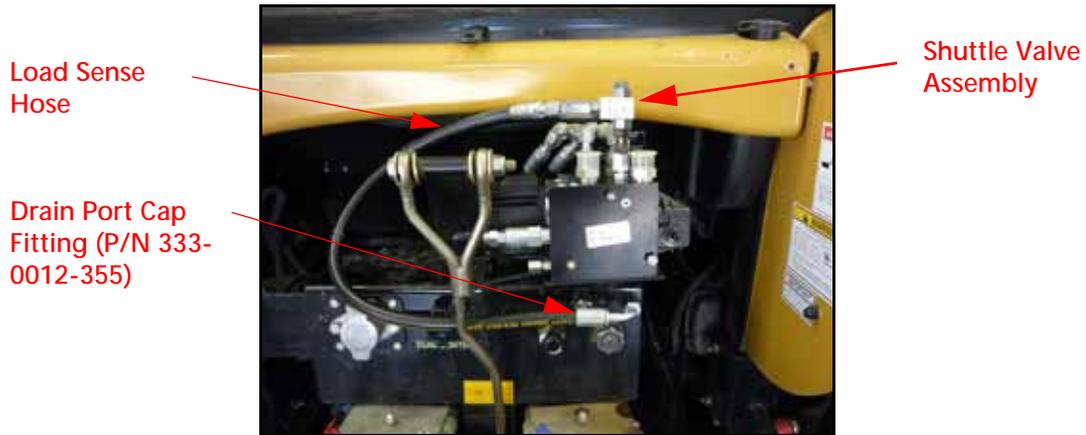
Load Sense and Drain Ports on the Hydraulic Valve
